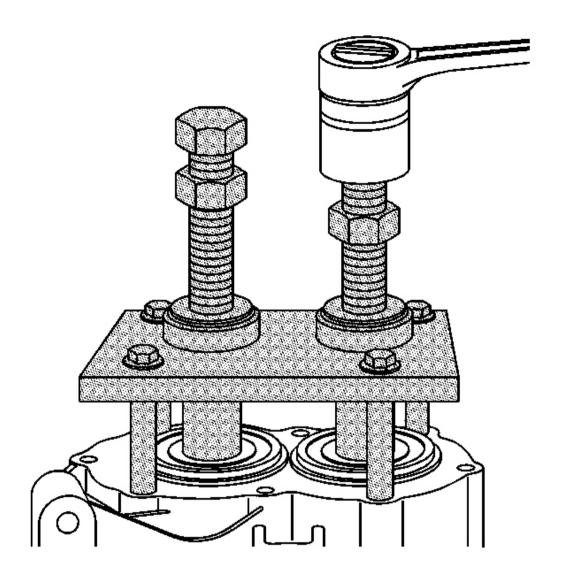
Removing Transaxle Case From Shafts Using J 44376-1, J 44376-2, And J 44376-3 Courtesy of GENERAL MOTORS CORP.
